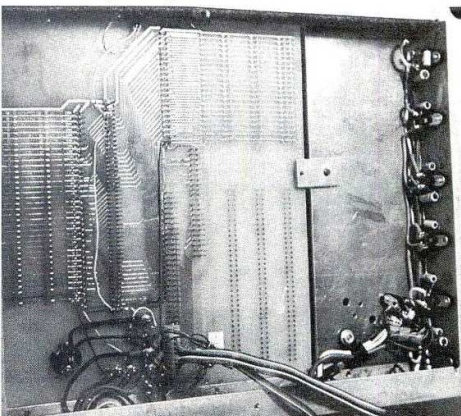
Bottom View of Main Chassis Mother Board In Center, a Molex Socket on End of a Ribbon Cable Connecting Keyboard. On End, Back of Regulators.
